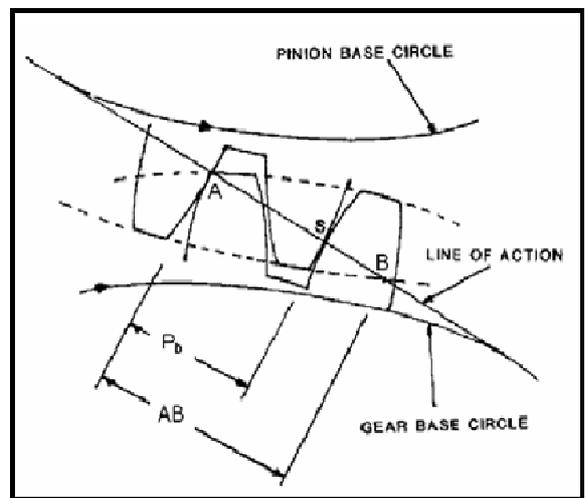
Gear Tooth Action<sup>[6]</sup>
